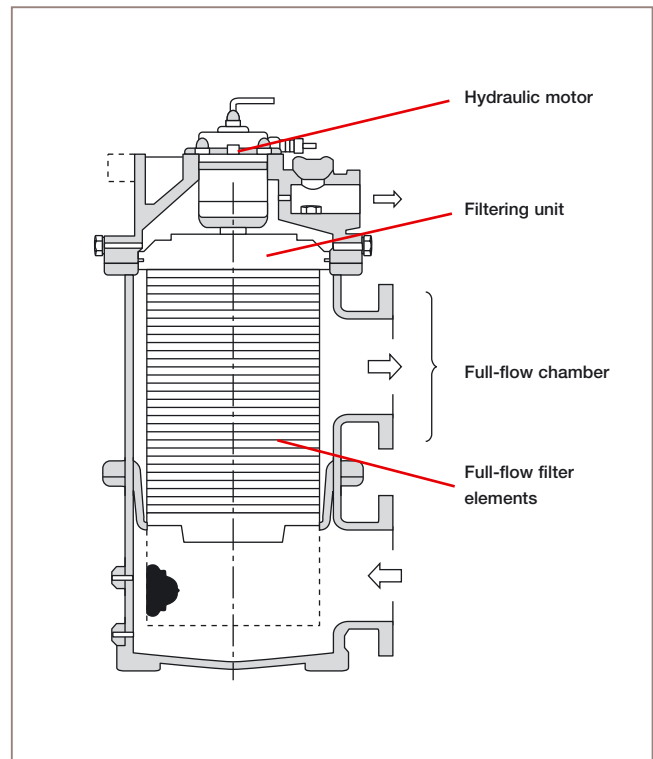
Fully assembled filter showing filtering unit and hydraulic motor.
